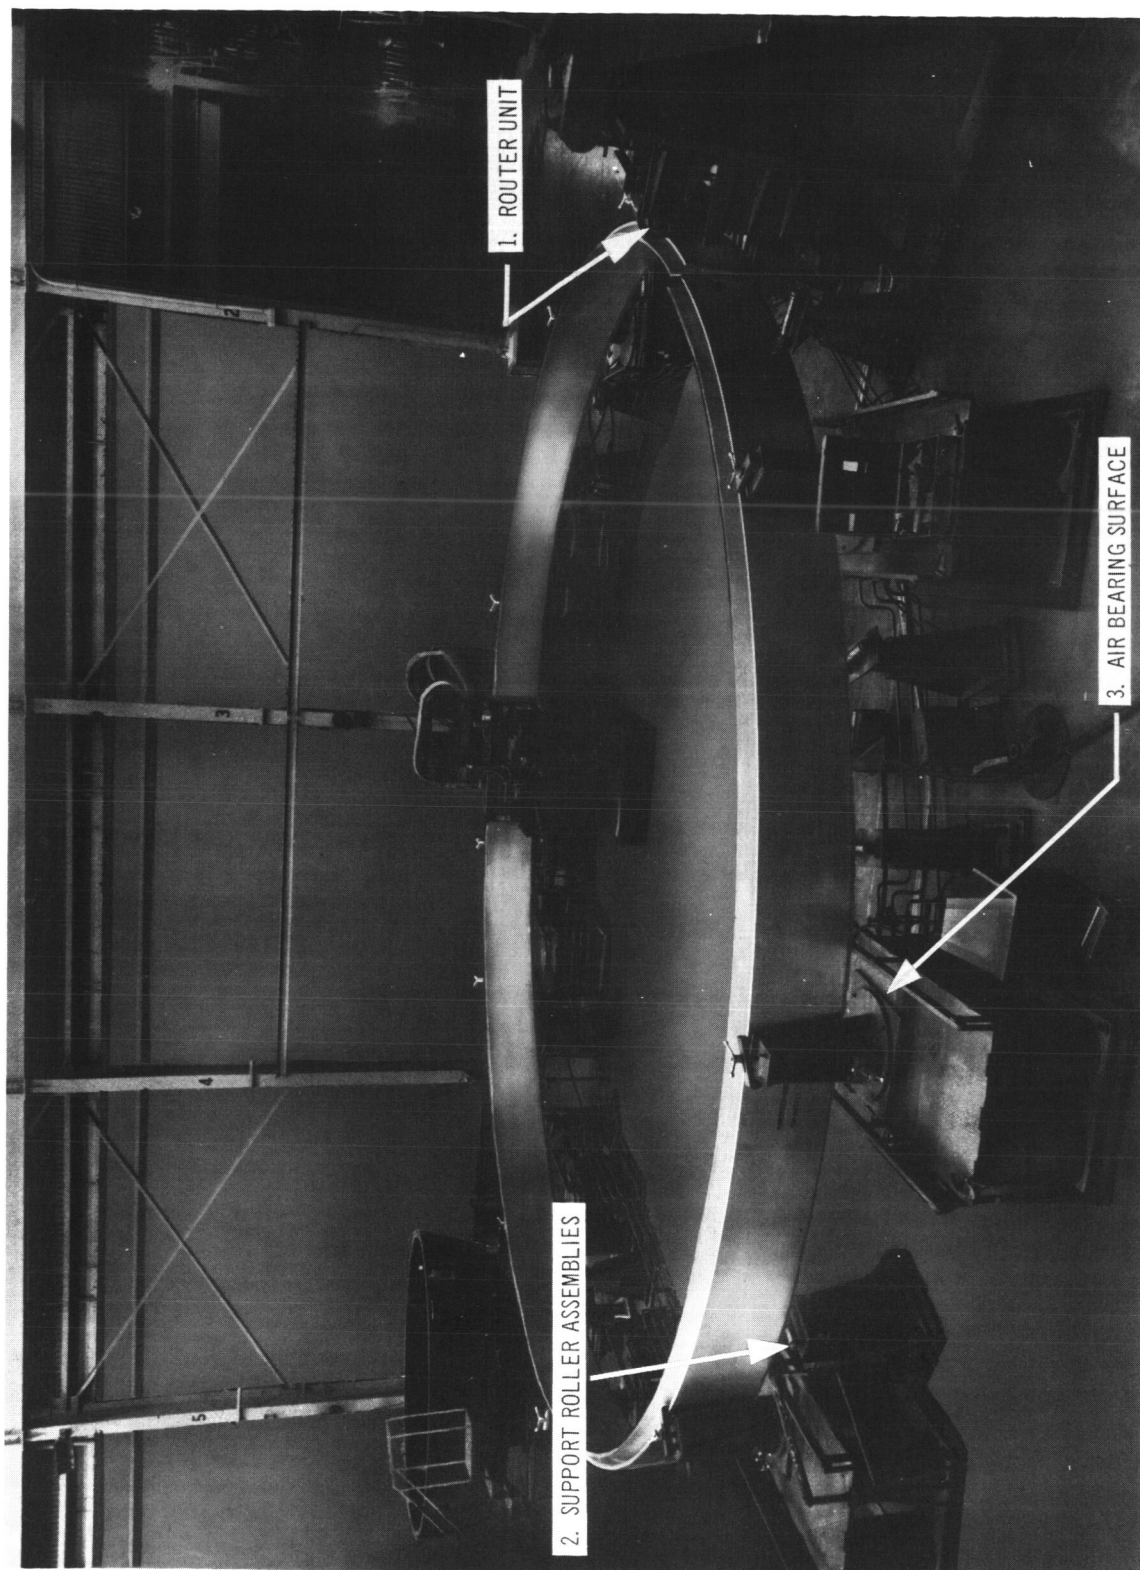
EQUIPMENT LAYOUT FOR ELECTRON BEAM WELDING Y-RING
